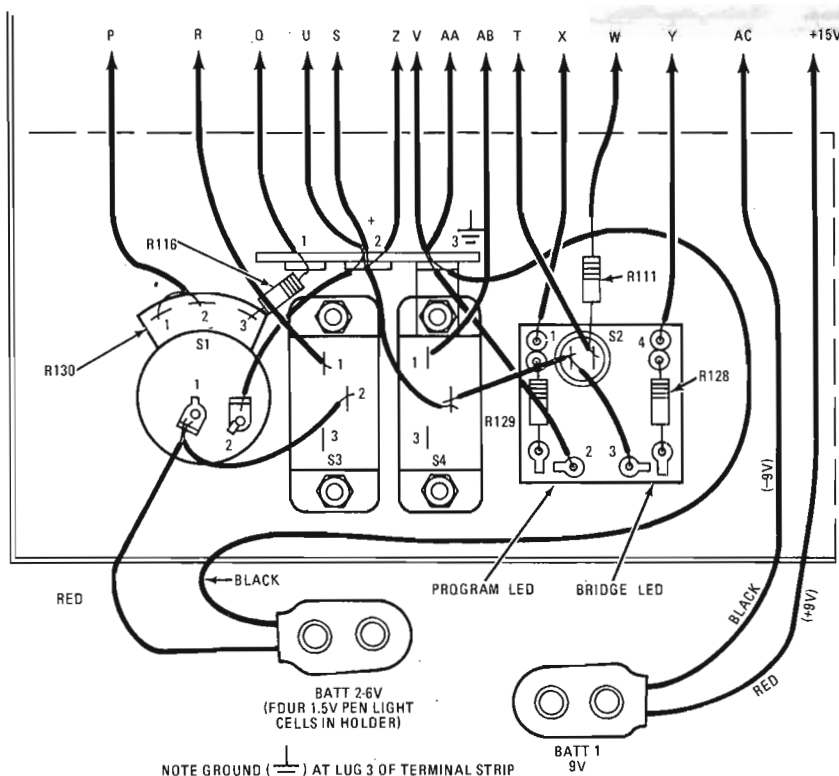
CONTROLS AND SWITCHES are mounted on the main PC board. Point-to-point wiring to the main board is shown in Fig. 6.
